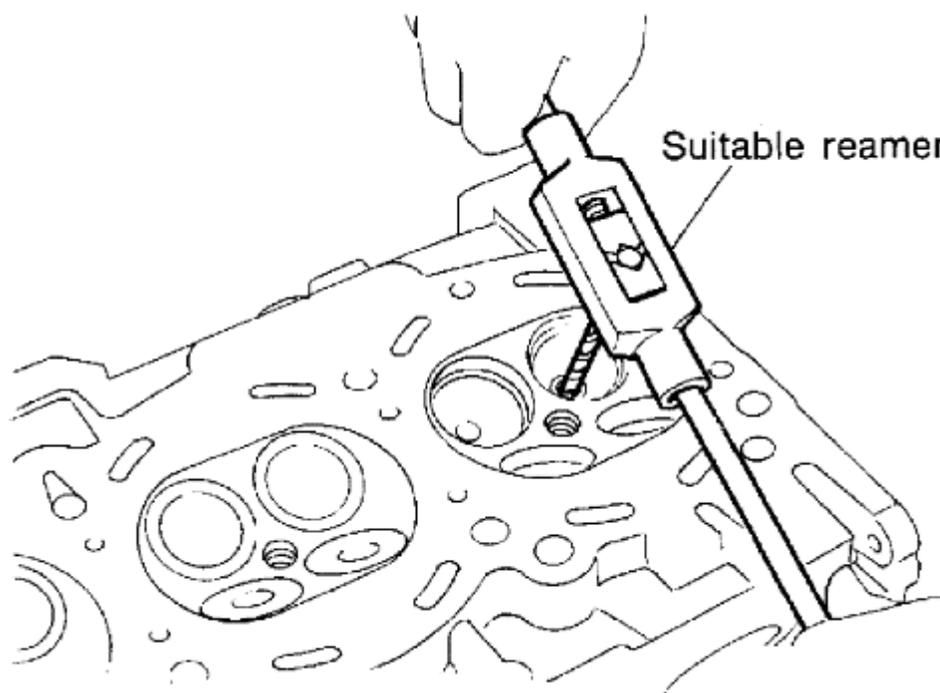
Reaming Cylinder Head Valve Guide Hole
